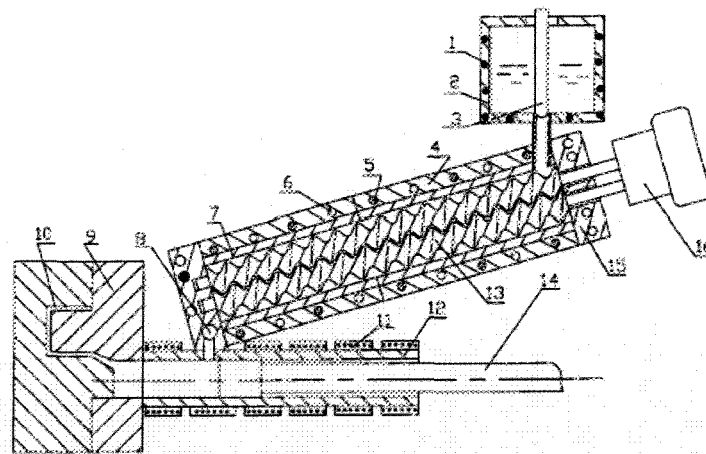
Schematic illustration of the twin-screw rheomolding process. 1)heating elements; 2)crucible; 3) stopping rod; 4)barrel; 5)heating elements; 6)cooling channels; 7)barrel liner; 8)transfer valve; 9)die; 10)mold cavity; 11)heating elements; 12)shot sleeve; 13)twin-screw; 14)piston; 15)end cup; 16)driving system [115]
